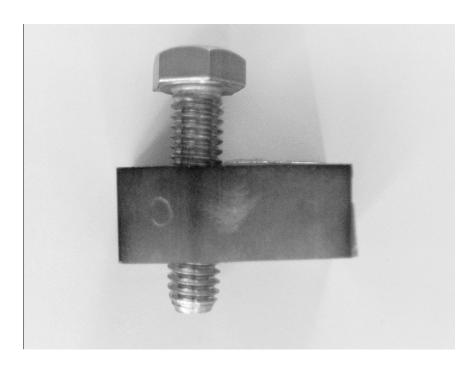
Example of Good Fitness between Sintered Threads Made by Green Machining and the Appropriate Fastener.
